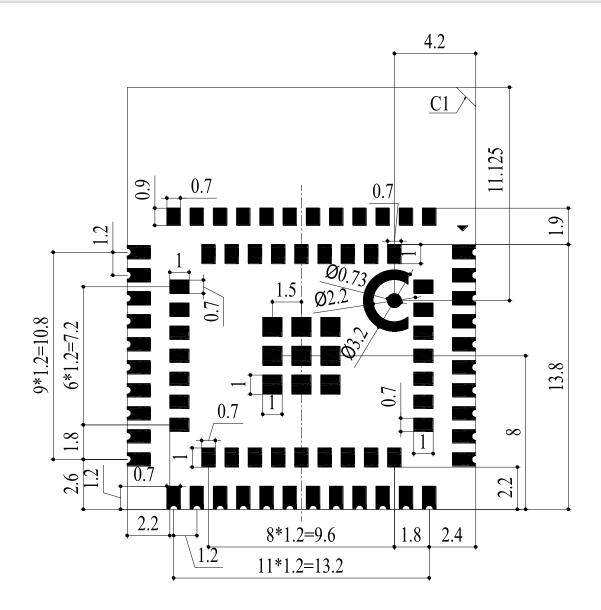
FCM561D-P Bottom Dimensions (Bottom View)
